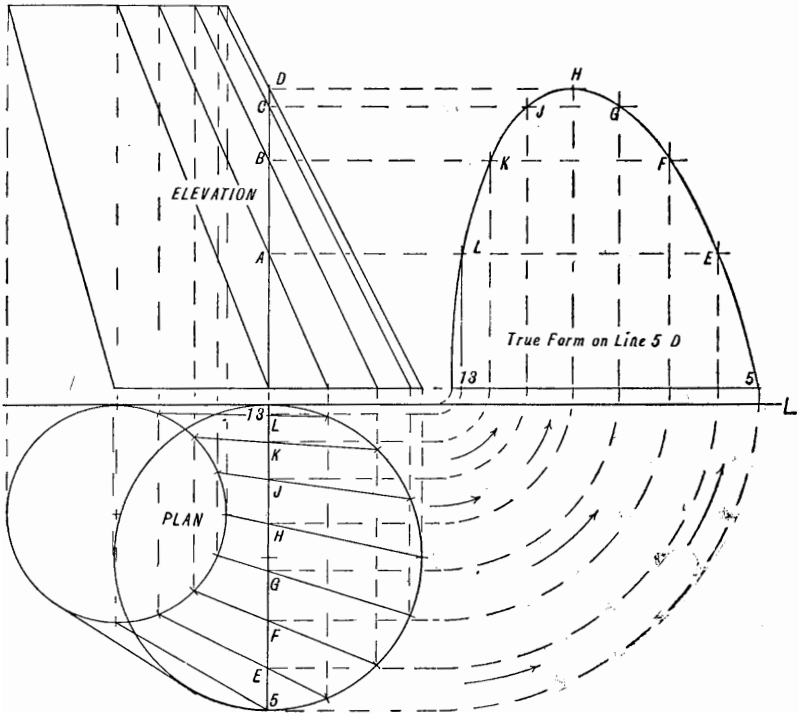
Plan, Elevation, and True Form of Section When It is Required That the Fitting Be "Flat on One Side."
